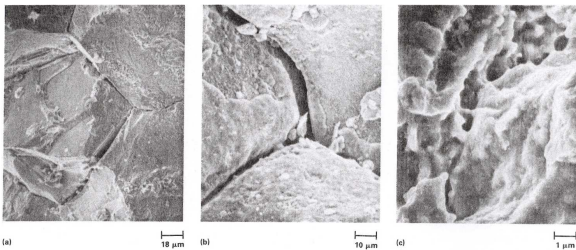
(ASM p26) Intergranular cracking is consistent with many types of failure mechanisms. These happen to be creep fractures of Inconel 625, Incoloy 800, PE-16-grain boundary cavitation.
